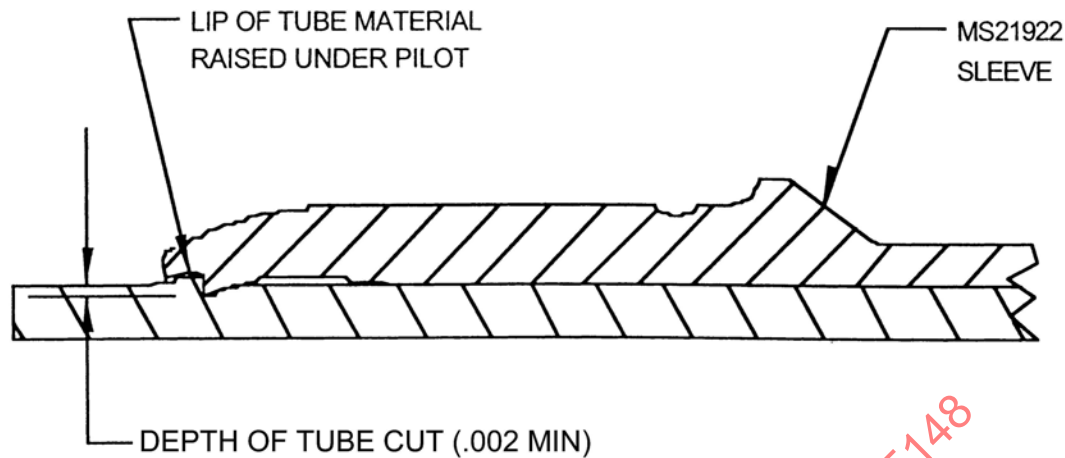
Typical Tube Cut Produced by Bite Type Sleeve
